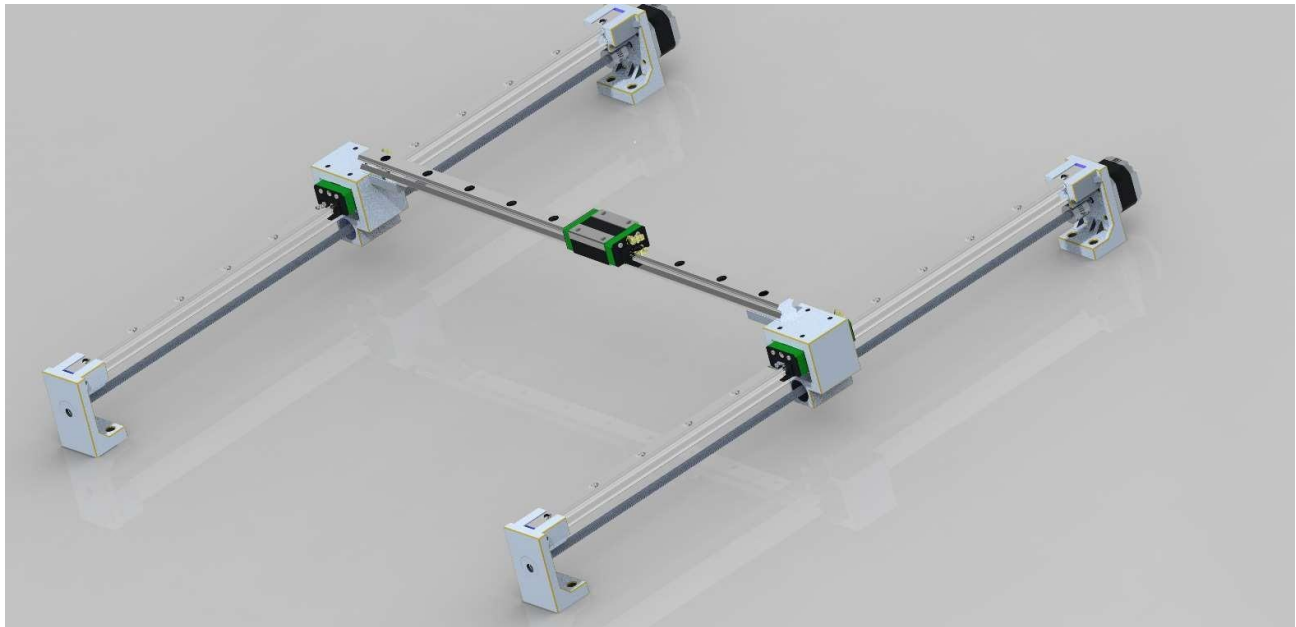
Assembled View (3D) of the Mechanical frame of the Machine.
